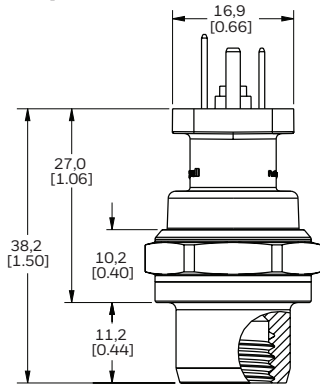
DIN-C Mounting Dimensions (for reference only. mm [in])
